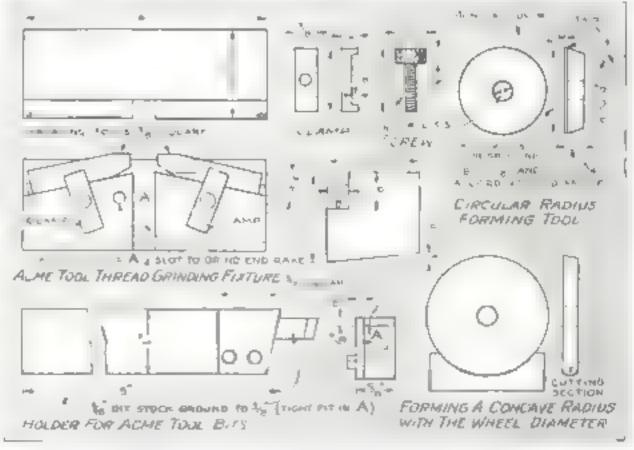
How the firture for ferming threading tools is constructed, a holder for a threading tool; a circular radius forming tool; and how concave radii can be formed,
